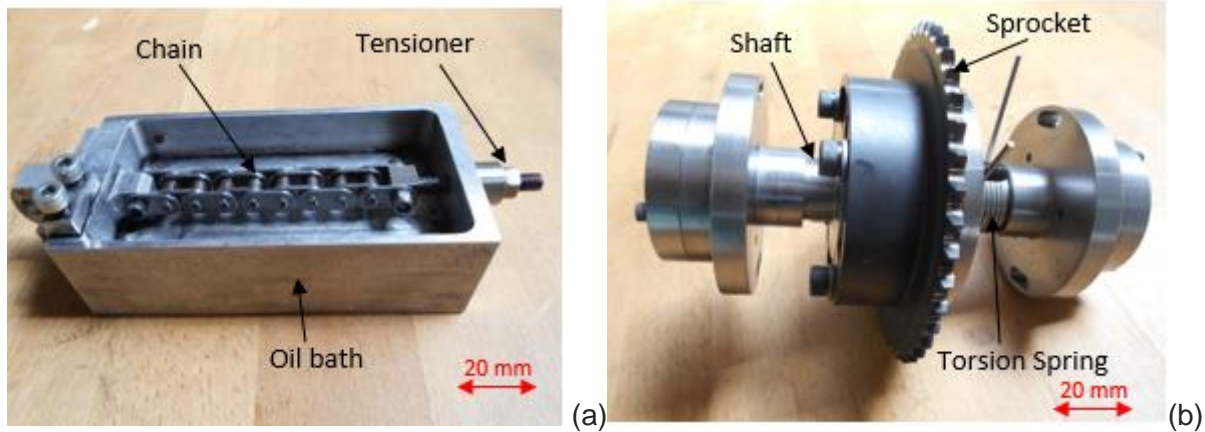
The pictures of assembled components (a) chain as positioned in the oil bath and (b) the sprocket as mounted on the shaft
